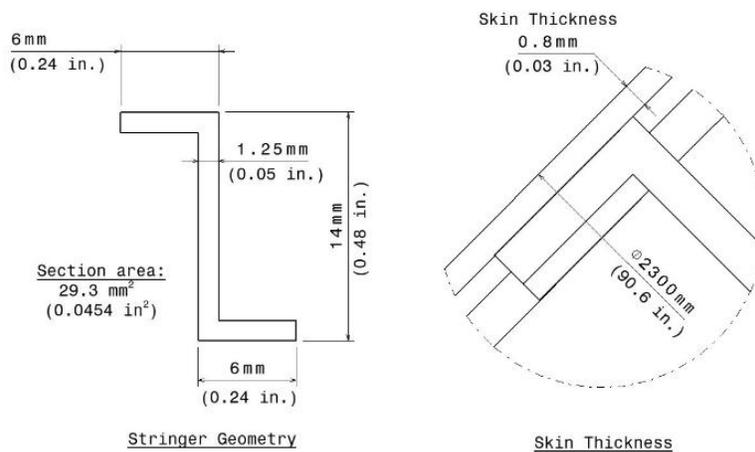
Dimensions of Fuselage Stringer and Skin
